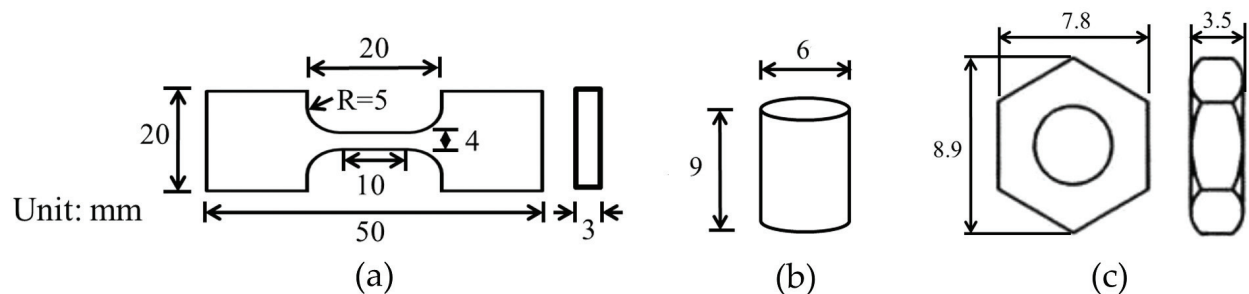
Dimensions of (a) tensile specimen, (b) compressive and forming specimen and (c) screw nut for forming test at high temperature.
